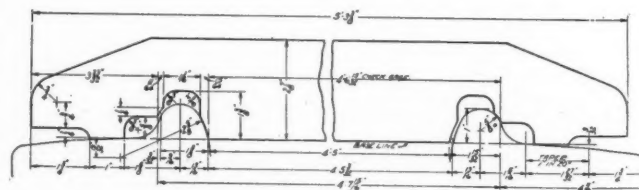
Proposed mounting gage for use on reinforced flange cast iron wheels
